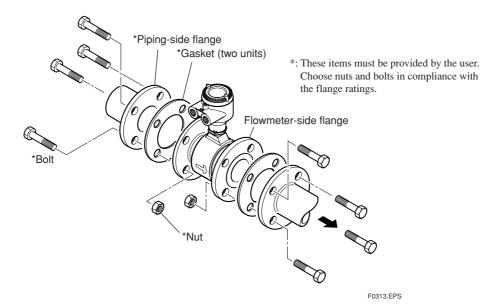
Mounting Procedure for Flange Type (size: 2.5 mm (0.1 in.) to 400 mm (16 in.))
